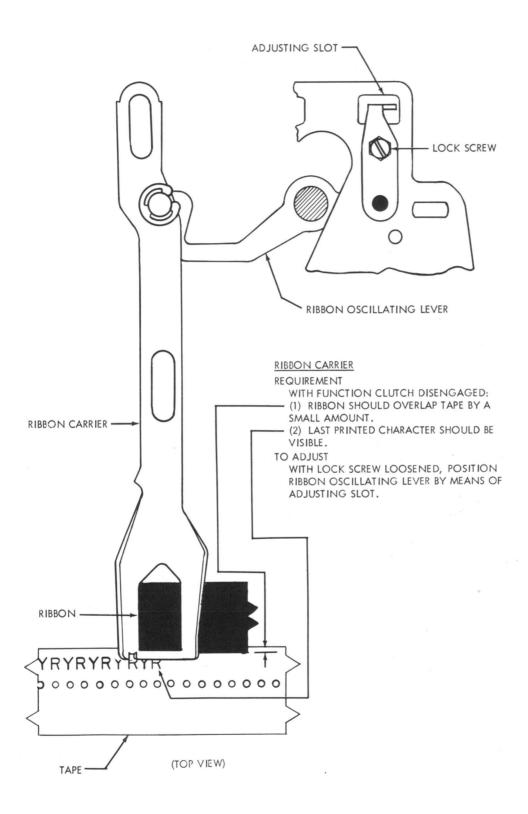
RIBBON OSCILLATING MECHANISM
